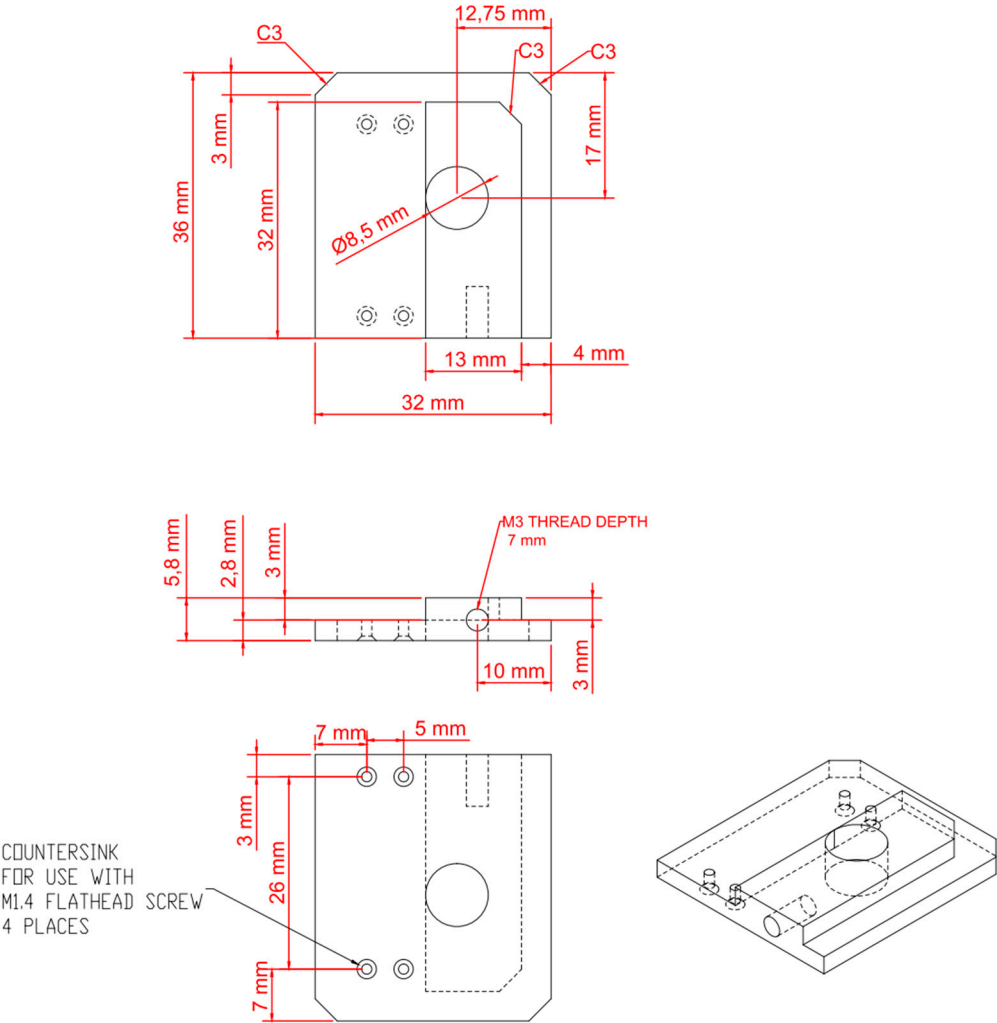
Detailed mechanical drawing of Part C1 from Figure S18.
